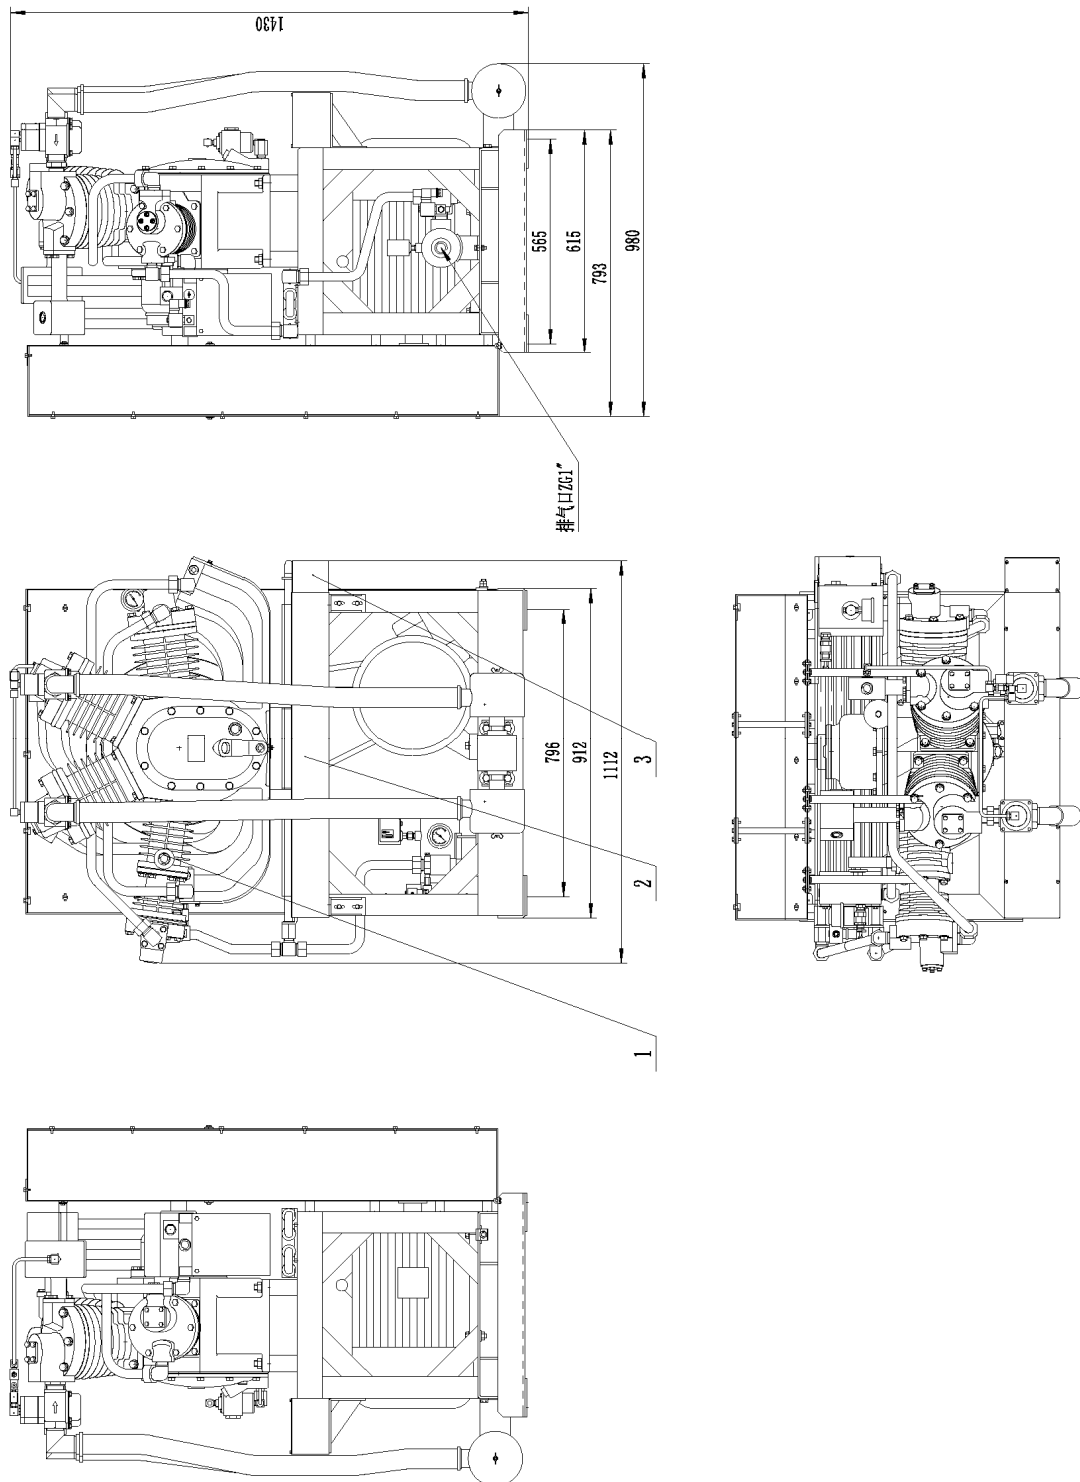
Figure A: Outline Drawing of 09SH Single-Engine Unit (horizontal type)
